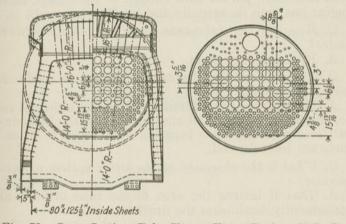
Cross Section, Tube Sheets, K 4 s Engine, P. R. R.
